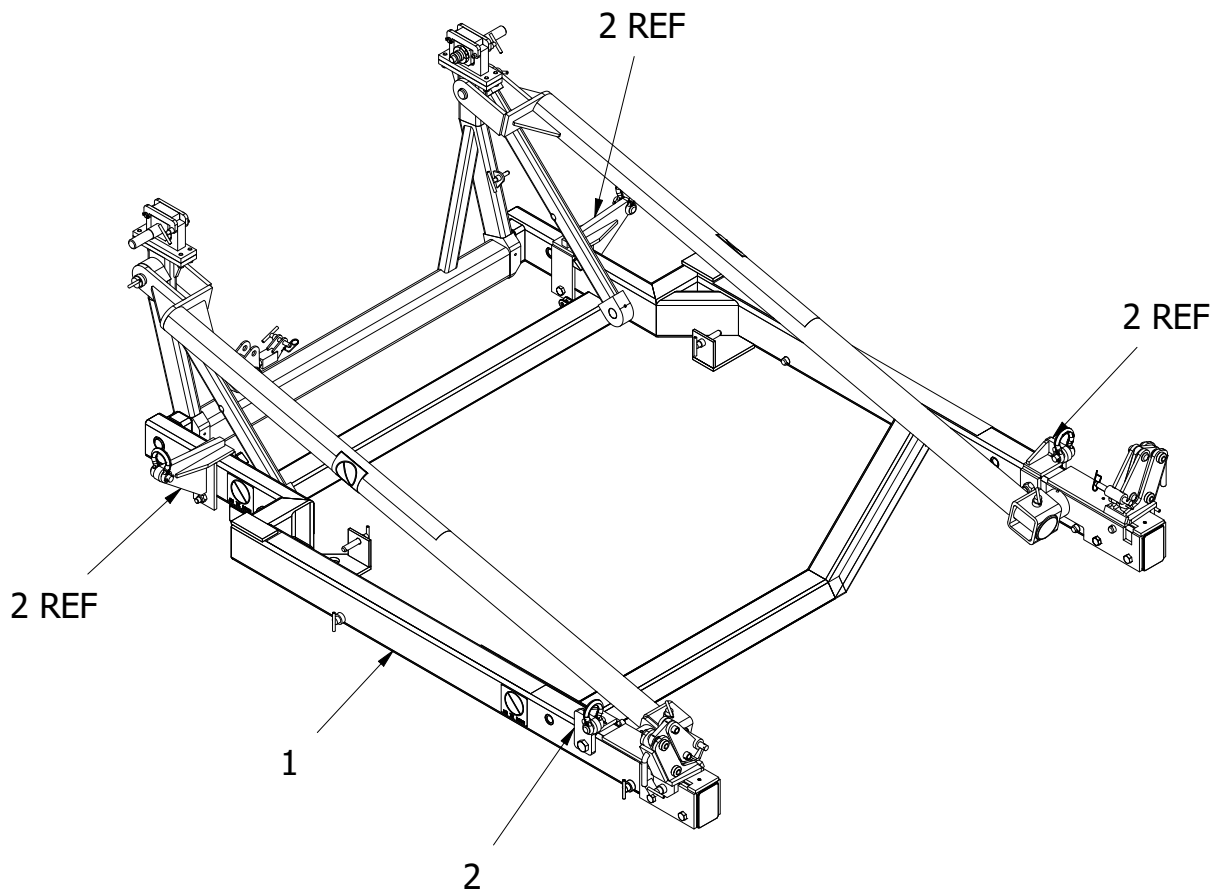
AM-1928-156-80C2-M Cradle Assembly with Bootstrap Adapters for CF6-80C2
